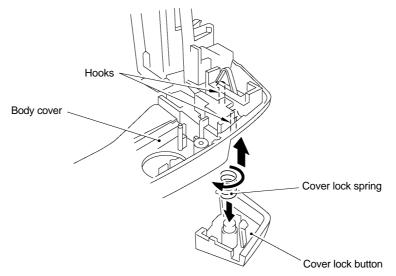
Reassembly of the Cover Lock Spring and Button
